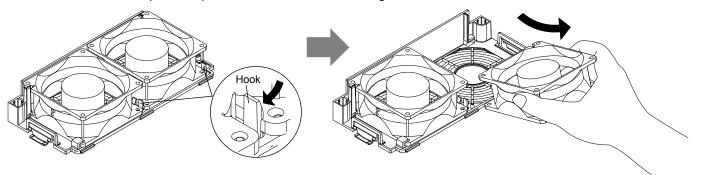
Remove the Right-Side Cooling Fan: 2A0075 to 2A0114 and 4A0052 to 4A0096
